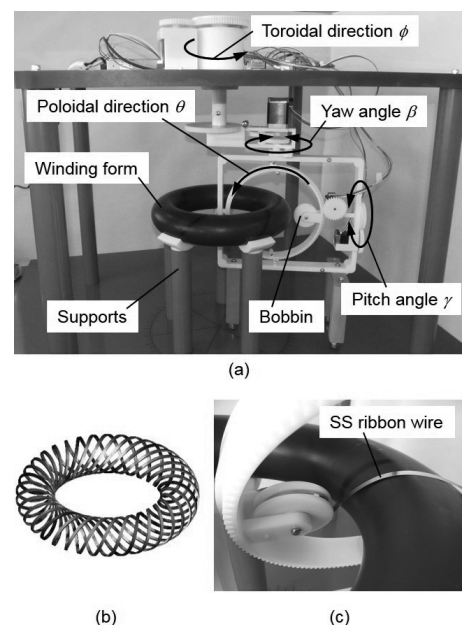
(a) Prototype winding machine for (b) a model force-balanced coil using YBCO tapes. Test winding was successfully carried out (c) using stainless-steel ribbon wires with the torsion controls.
